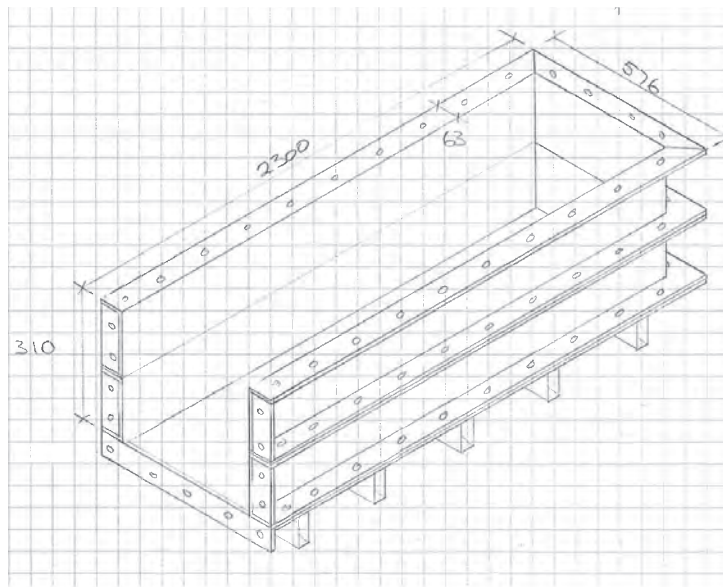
Isometric sketch of flume walls and base (end-plate, gasket, lid and bolts not shown) (dimensions in mm)
